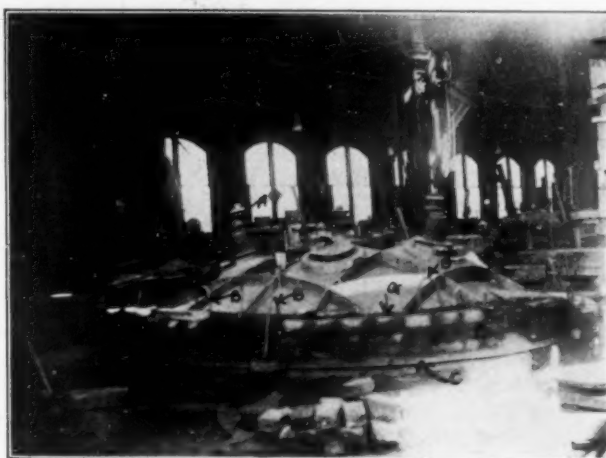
THE SAME MOLD AS IN FIG. 1, SHOWING BUILT-UP CHEEK PIECE.
